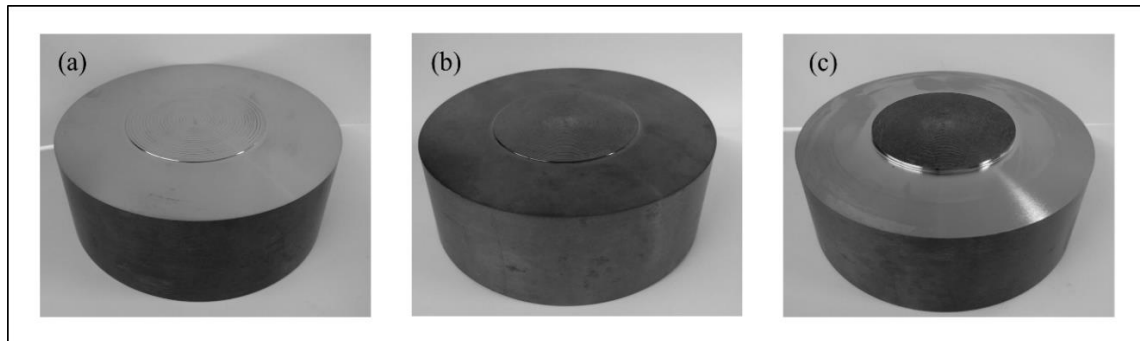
Three Stages of Workpiece (a) Premachined (b) Stress Relieved by Heat Treating (c) After Machining Experiment
